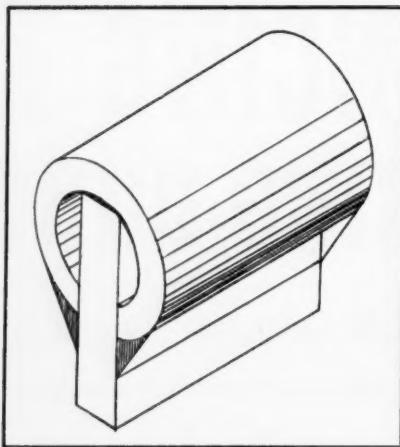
The tubing is sawed open, the steel sheet inserted, and welded as shown.
